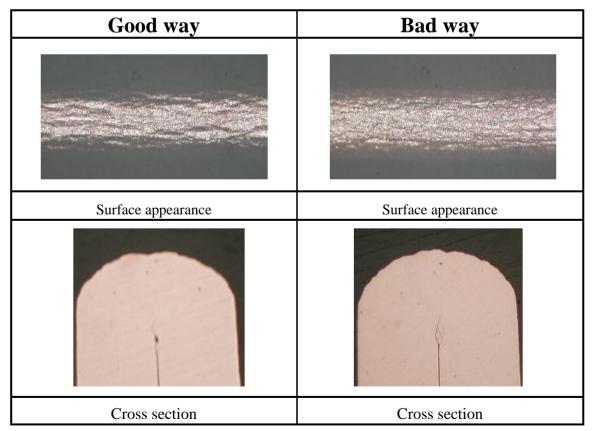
Surface appearances and cross sections of U-shaped bending test specimens. Temper 1/2H, Thickness = 0.2mm, R/t=0, Width =10mm
